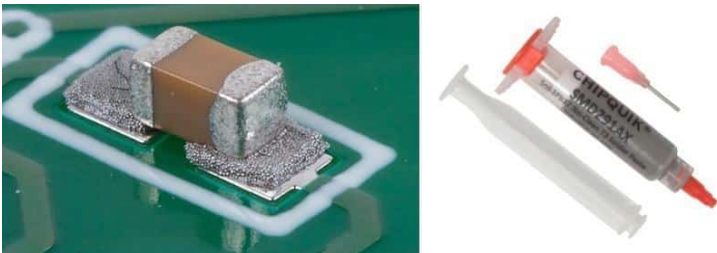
Solder paste in a syringe dispenser and an SMD component.
